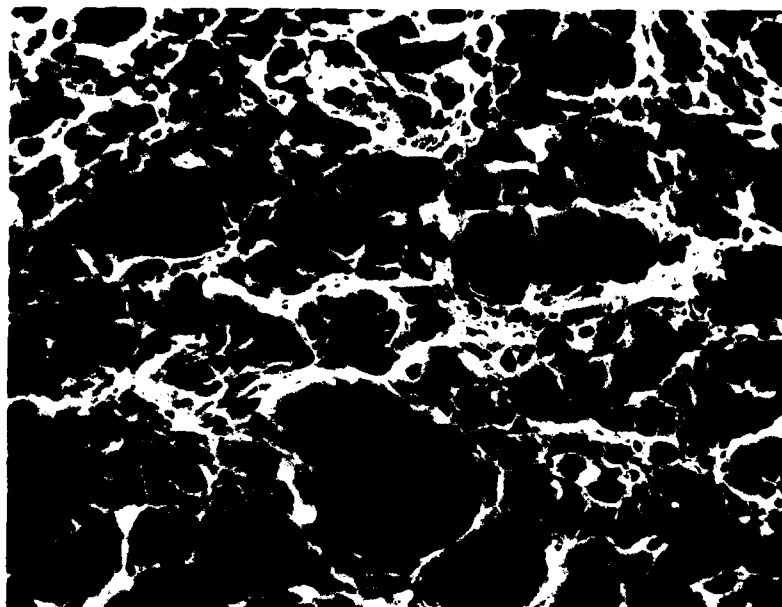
Typical fracture surface, ~1500X.
